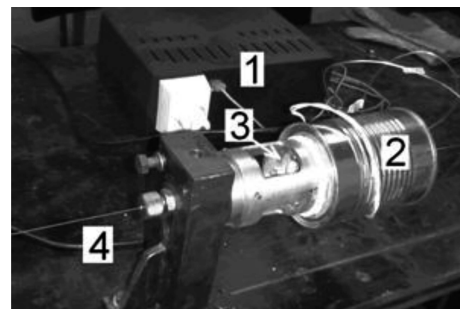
Device for wire drawing in heating die – (1) electronic block, (2) heating device, (3) drawing die, (4) wire after drawing
